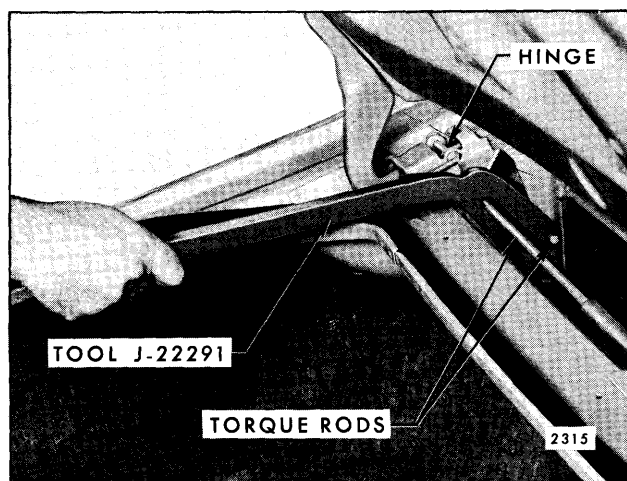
Usage of Tool J-22291 on - Oldsmobile and Buick "E" Styles
